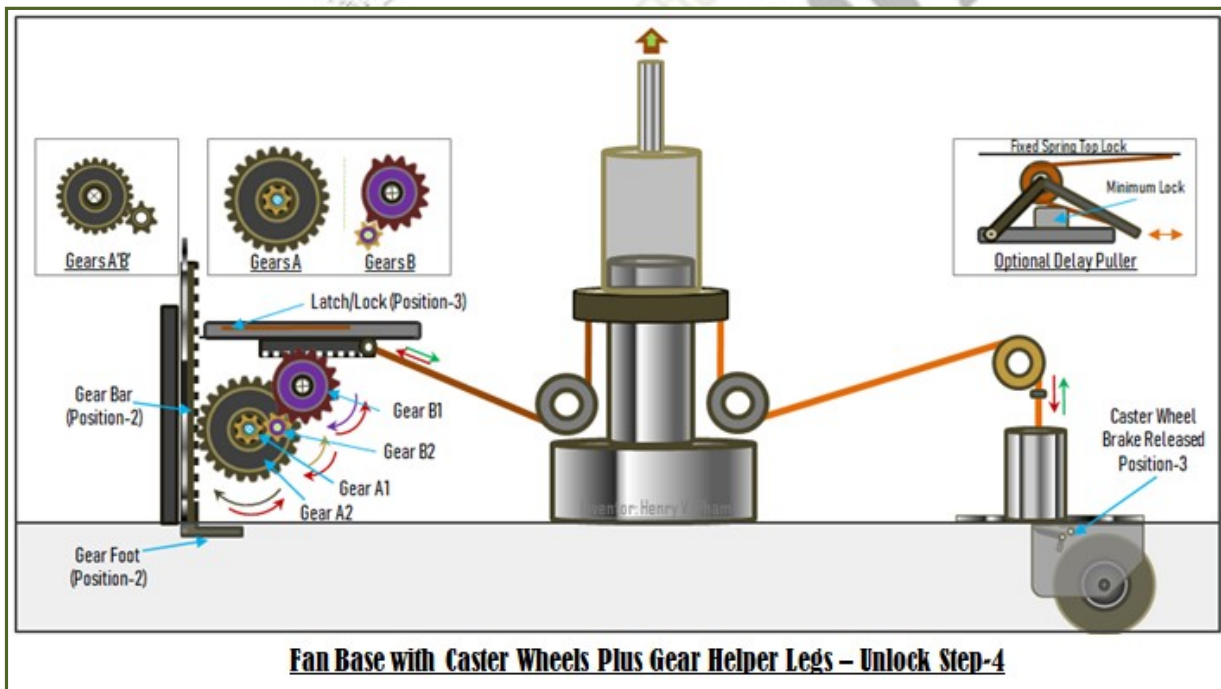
360° Stand G-Rotator Fan - Caster Wheels & Gear Helper Legs Lock/Unlock Step-4
